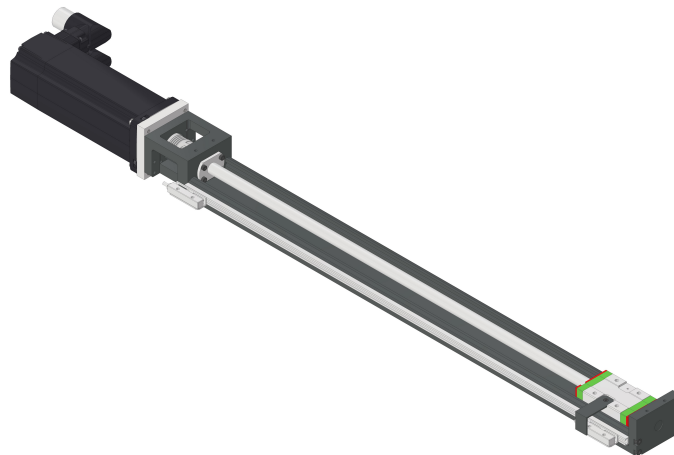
Actuator: screw drive, servomotor, adapter flange, bellow shaft coupling, inductive sensors.
